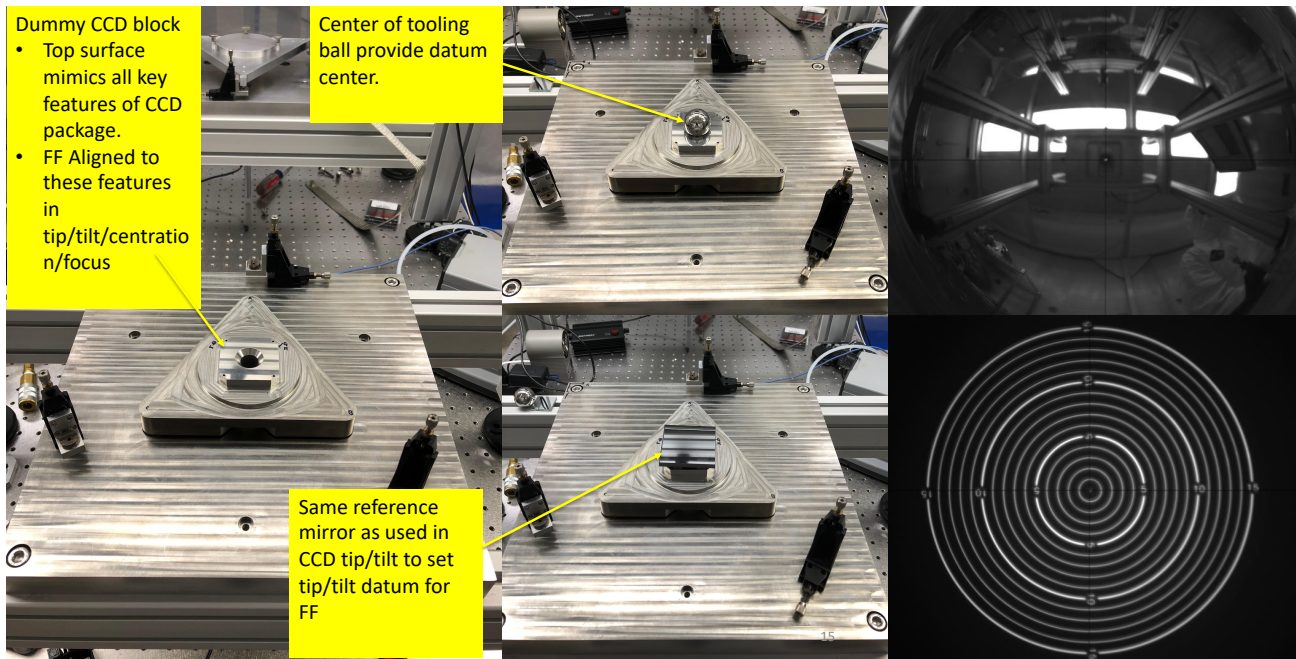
Datum fixtures for the field lens alignment and examples reticle target images from each datum fixture through the D-275.
